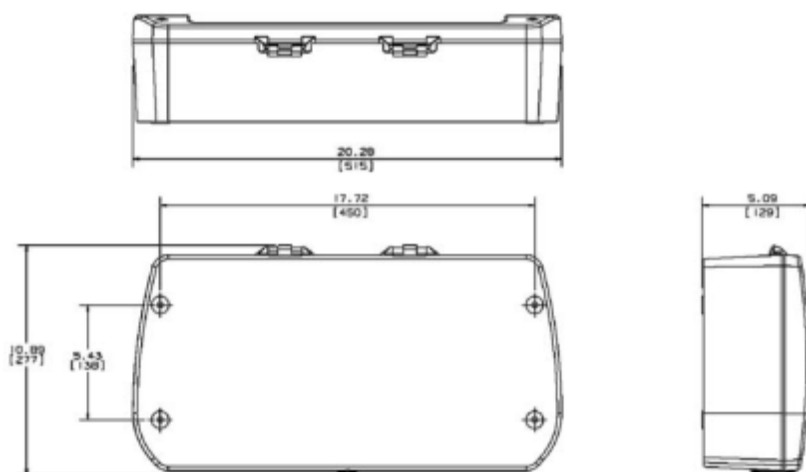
Mounting Drawing [dimensions in inches (mm)]
